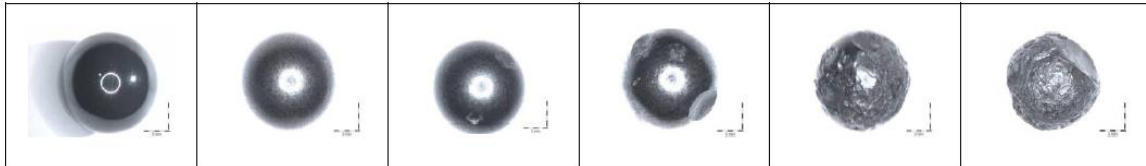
degradation of a ceramic ball in a motor spindle bearing until spindle failure (de Castelbajac, 2012, p. 133)
